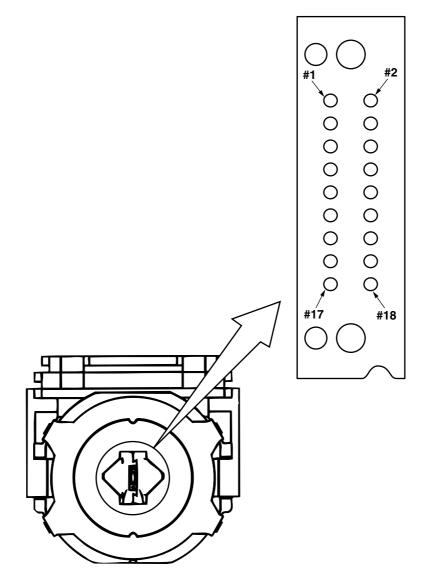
Head Pin Arrangement (Front view of the tip of the head)
